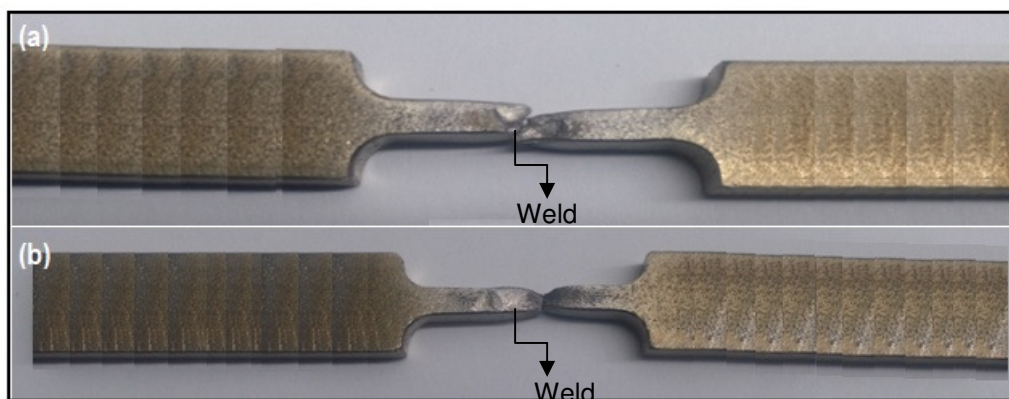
Photographs of transverse tensile samples containing laser welds performed at: (a) 0.11 kJ/mm; and (b) 0.23 kJ/mm.
